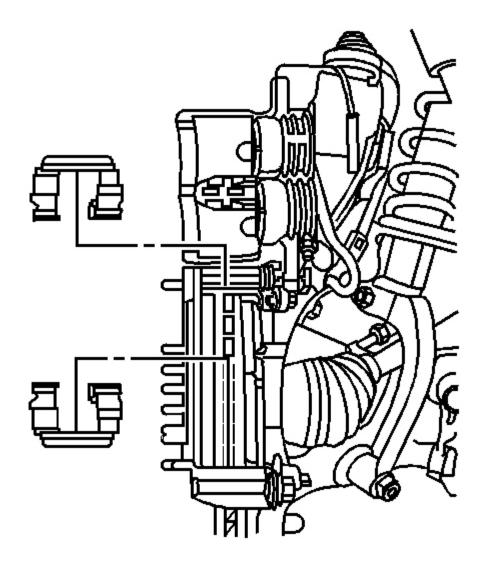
View Of Caliper & Related Components Courtesy of GENERAL MOTORS CORP.
